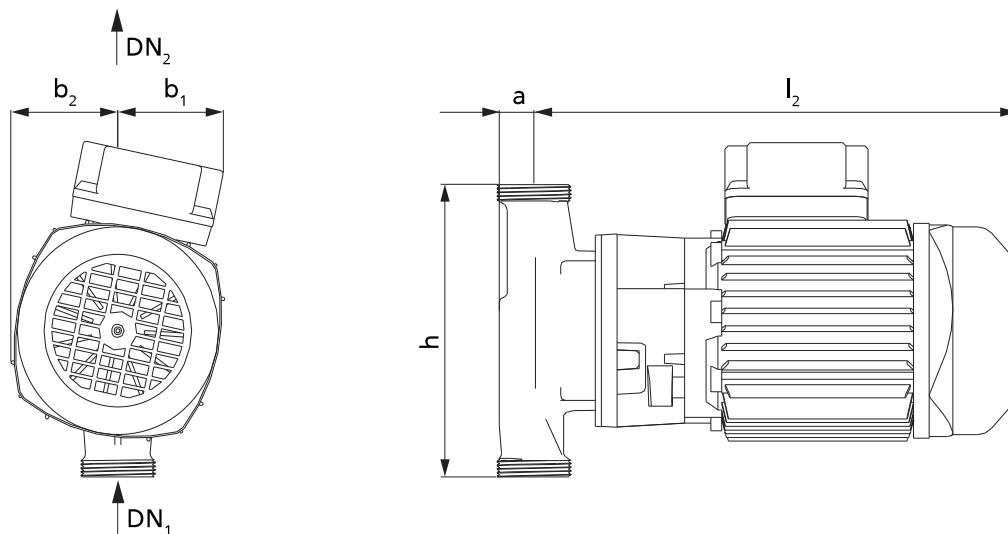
Dimensions of screw-ended pump set, size < 032-032-100
